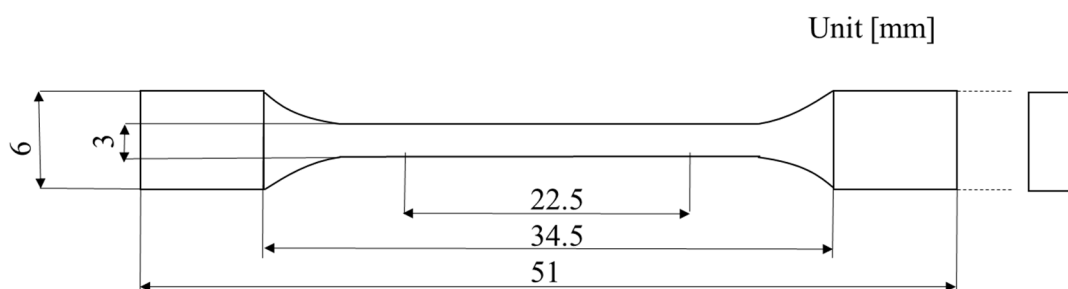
Dimensions of dumbbell-shaped specimen.
